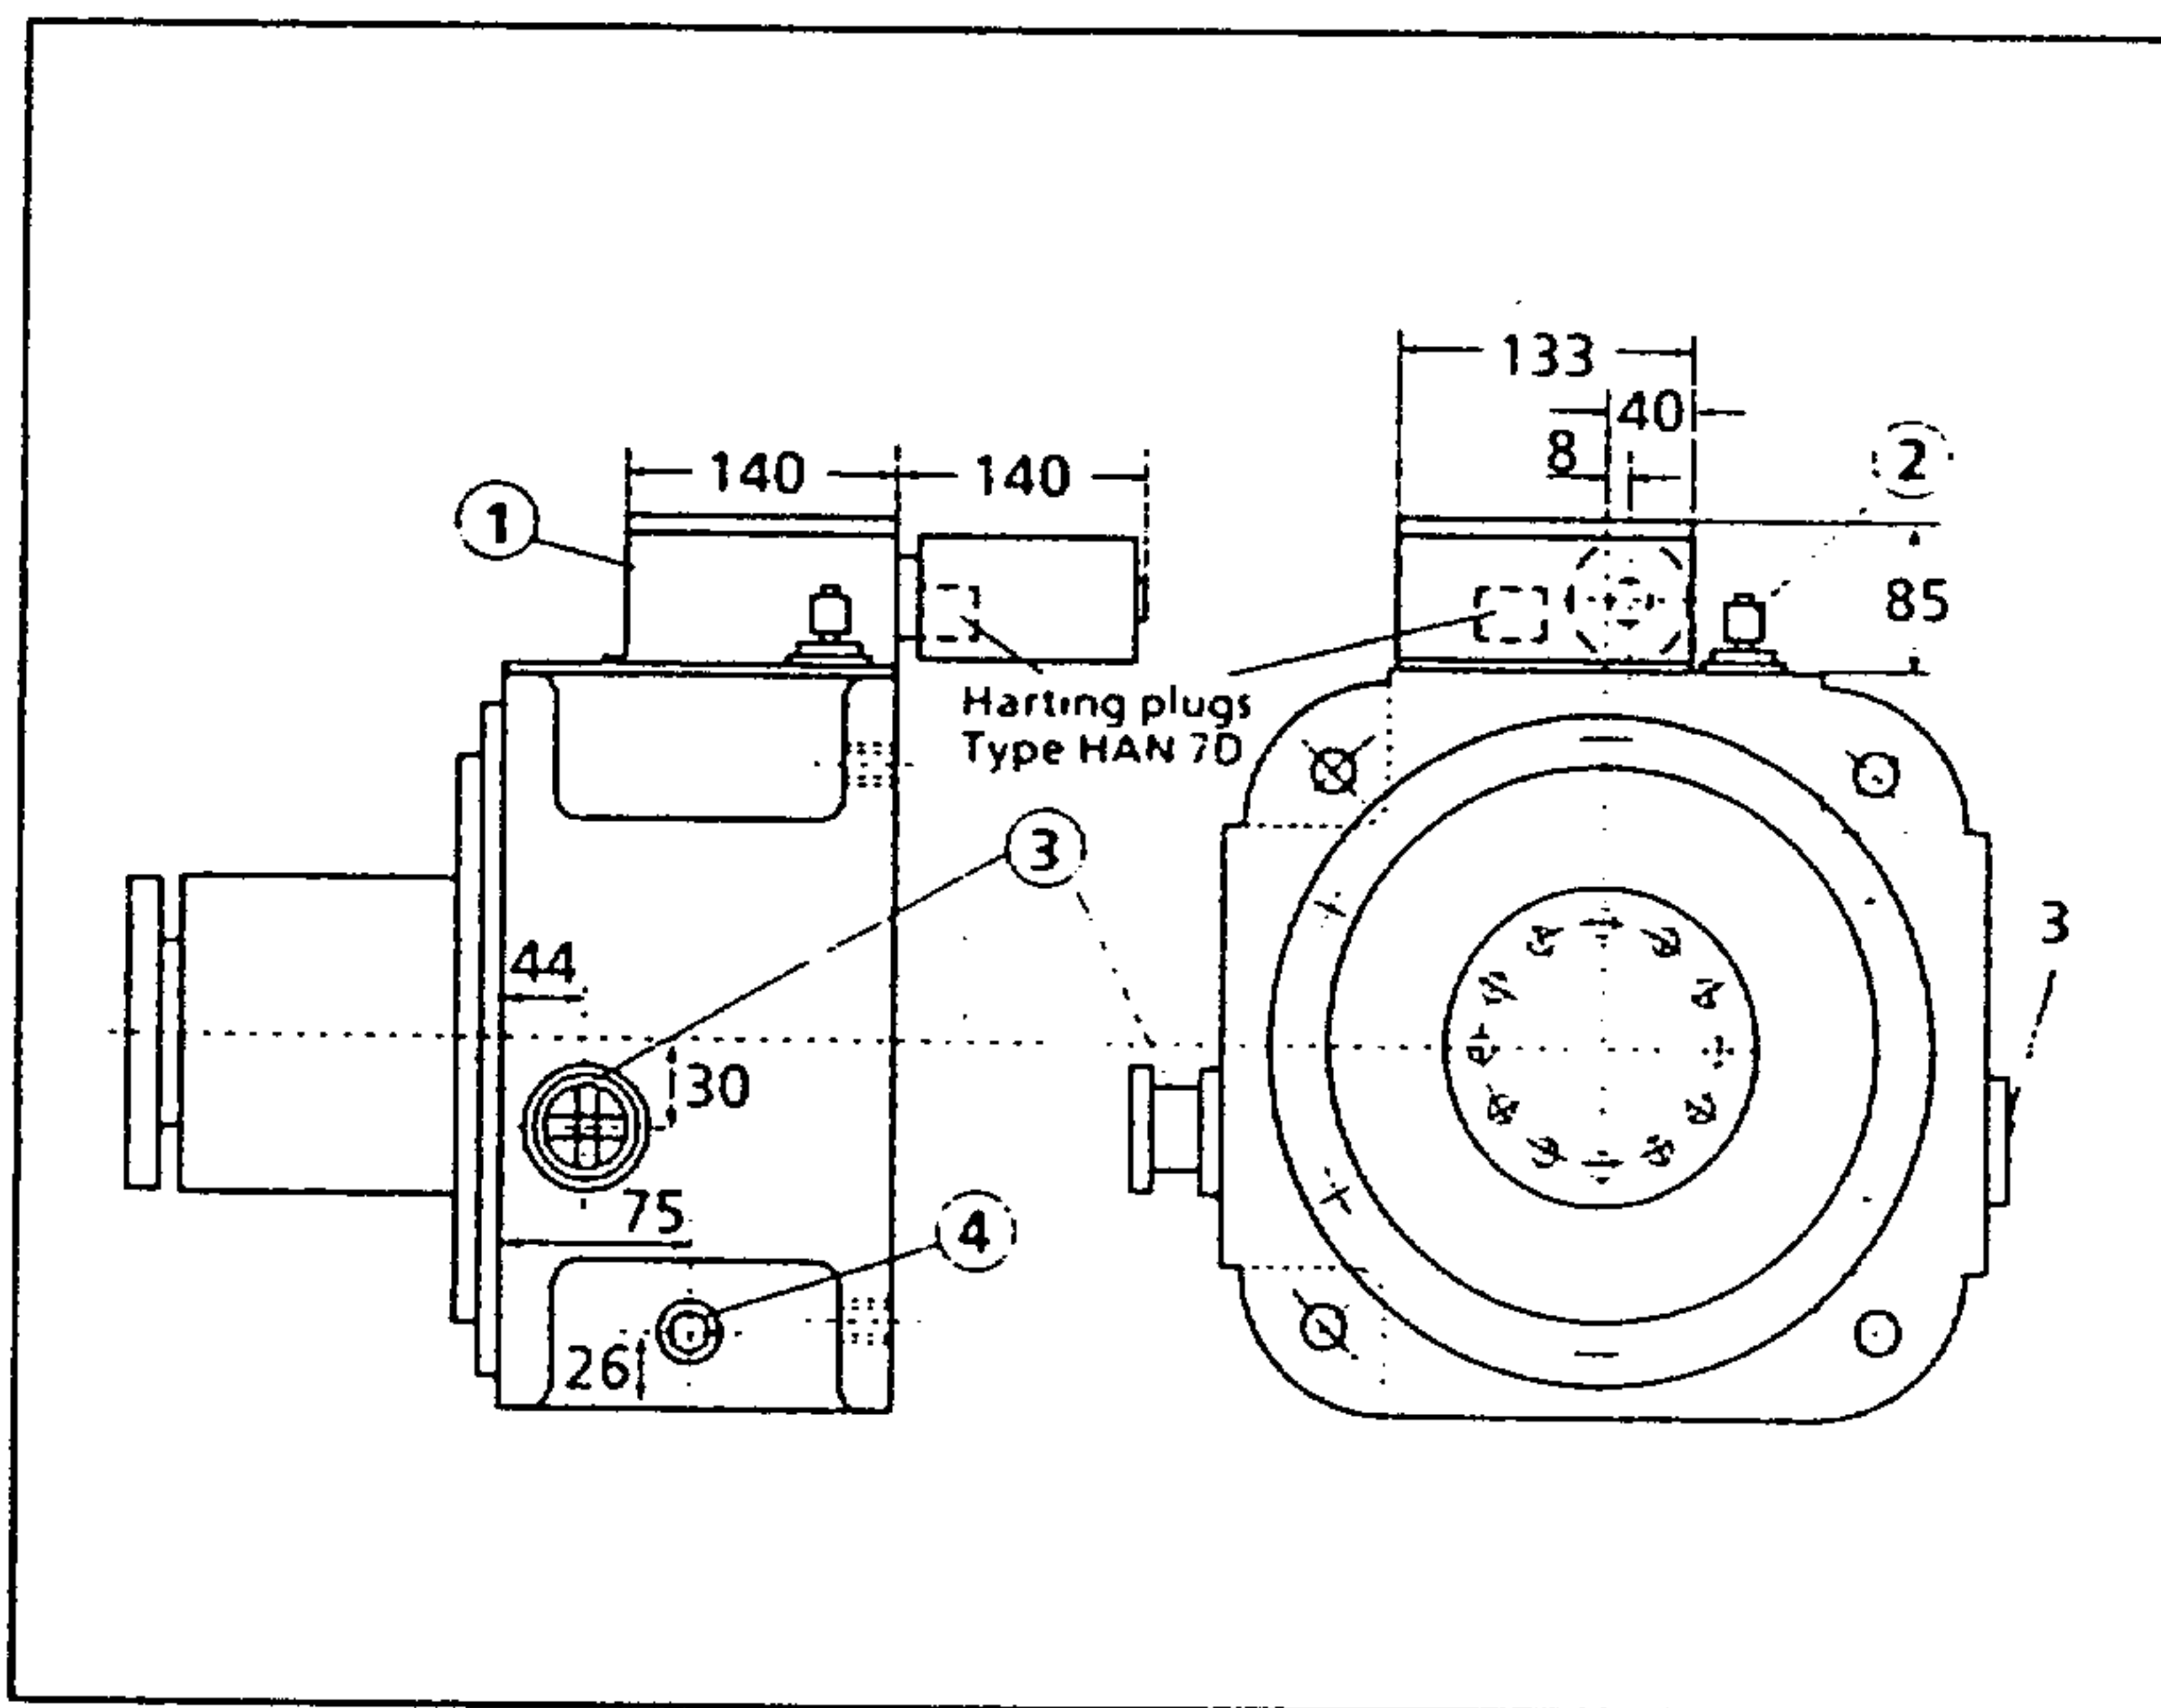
Gearbox with gear change unit for sizes 132 and 160
